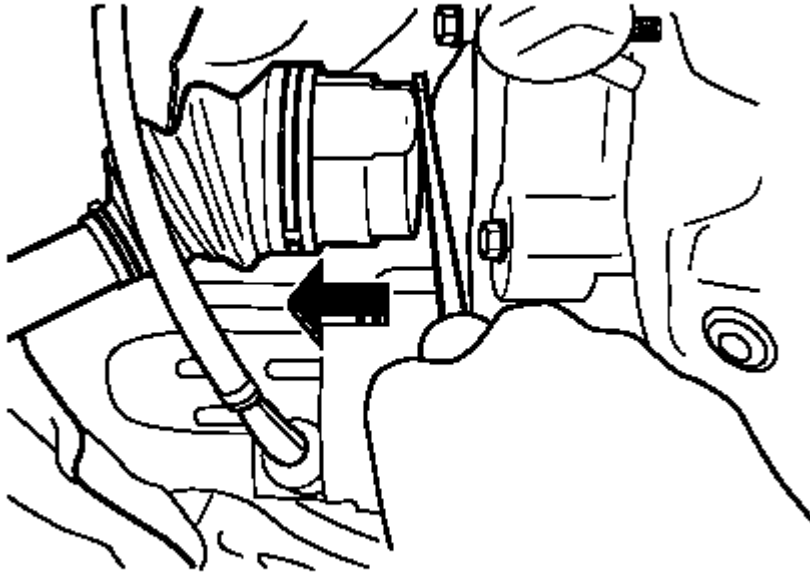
Removing Wheel Drive Shaft From Transaxle
